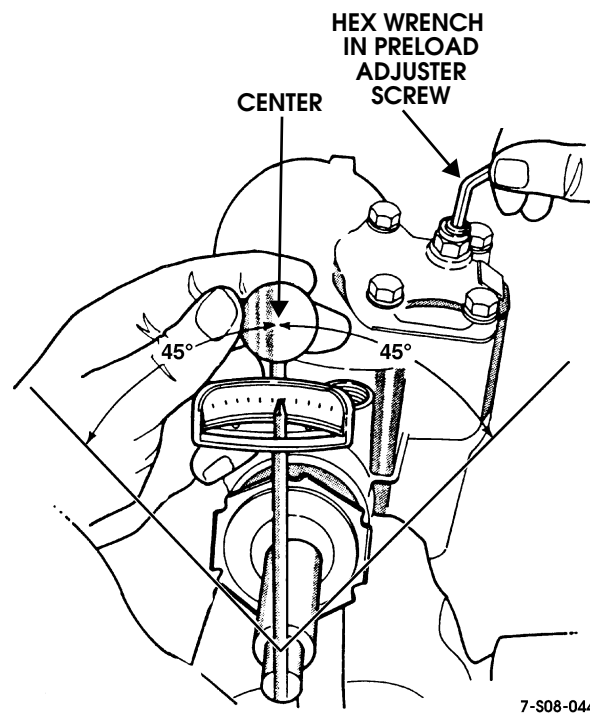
Checking / Adjusting Pitman Shaft Over-Center Preload
